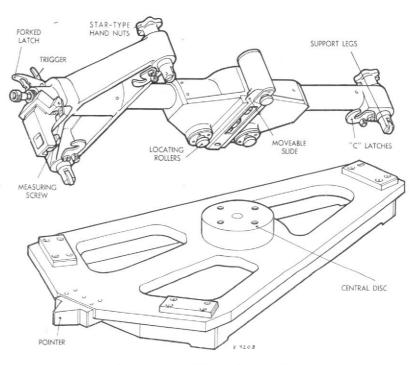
Checking gauge T.79527 about to be positioned on setting gauge T.72829.
